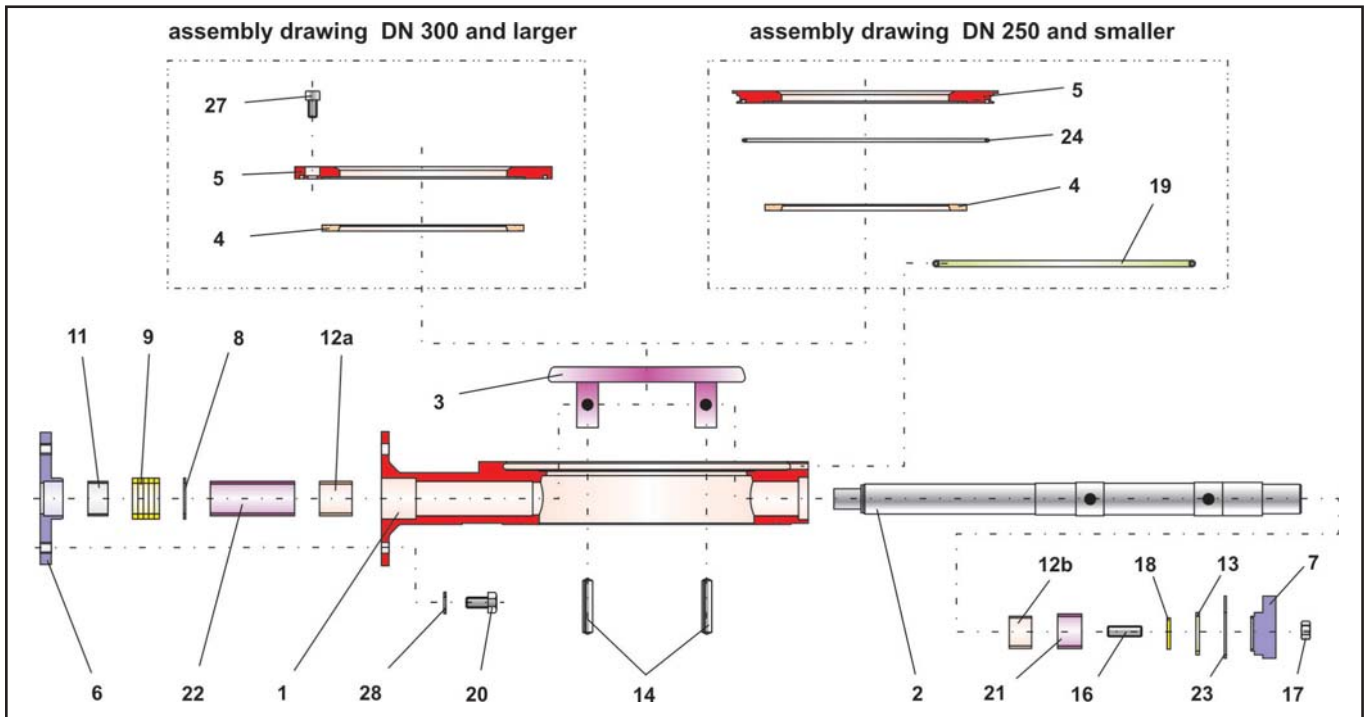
Exploded view of the Butterfly Valve Series 14b with adjustable stuffing box flange
